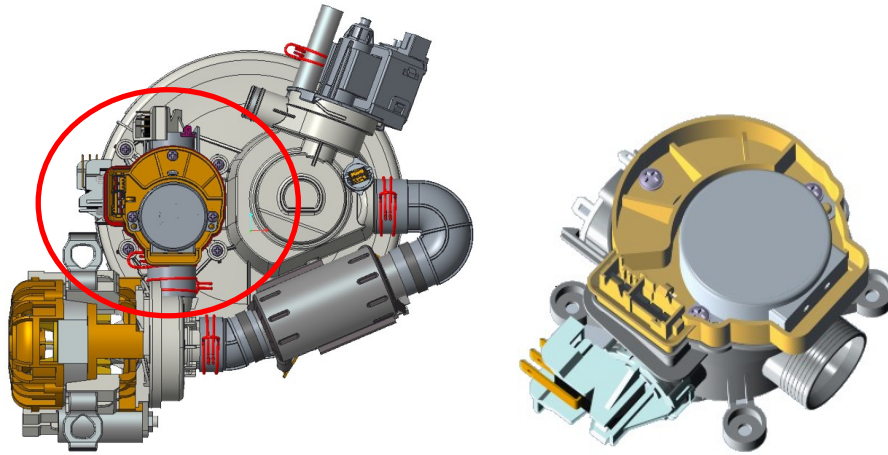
The Assembly of Diverter on the Hydraulic Parts
